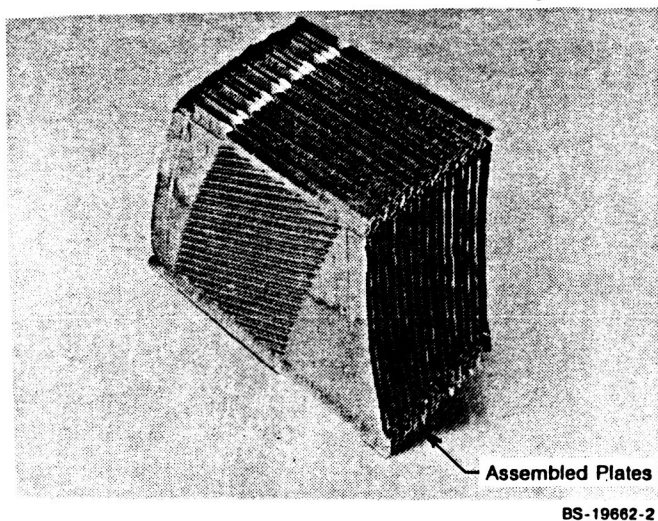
Sector of Welded Metallic Preheater
